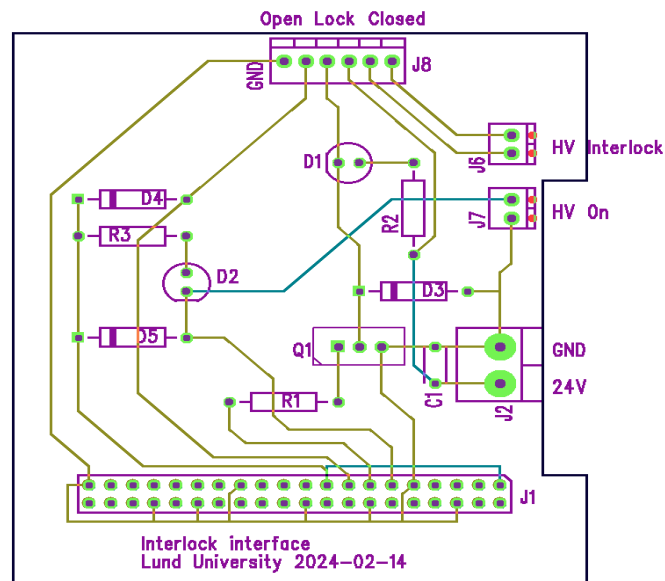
PCB’s design for the interlock feature. The PCB will be connected on top of the PITK-board.
